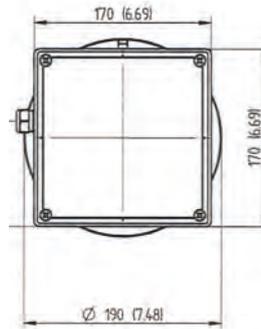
Dimensions integrated power unit Ex-Zone 2
